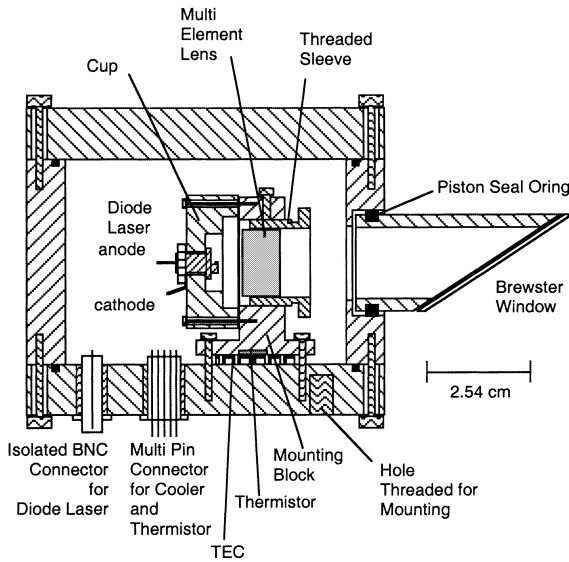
The air-tight housing and laser mounting system are shown approximately to scale.
